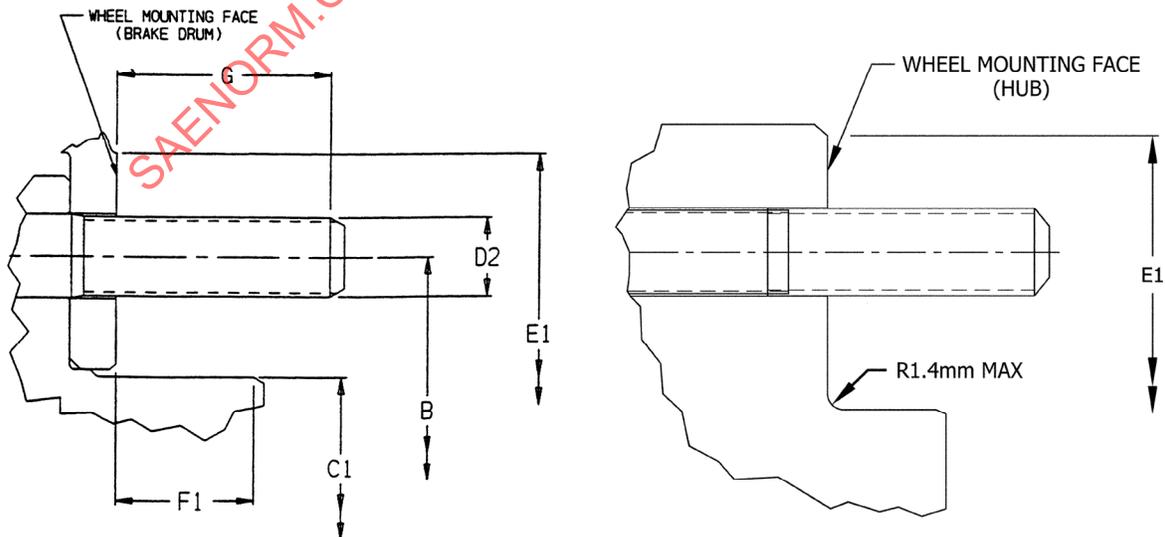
HUB OR DRUM INTERFACE DIMENSIONS
